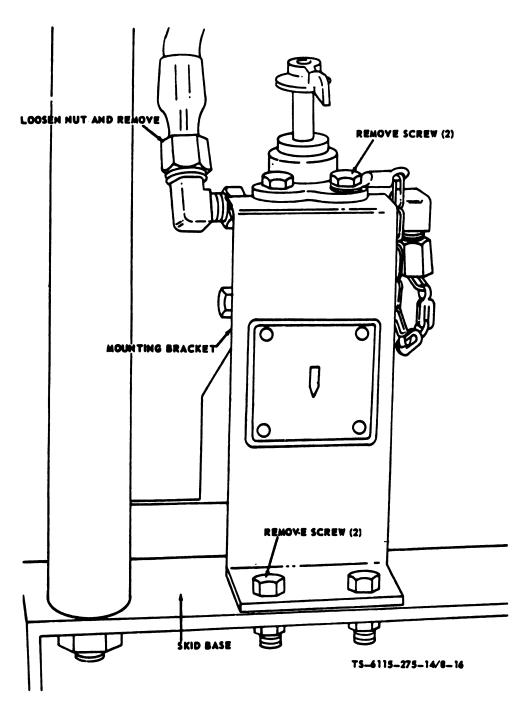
Three-way fuel valve, fuel filer, fuel valve mounting bracket, removal and installation (setal number range MA68-0001 through MA 68-2987) Model MEP-018A).
